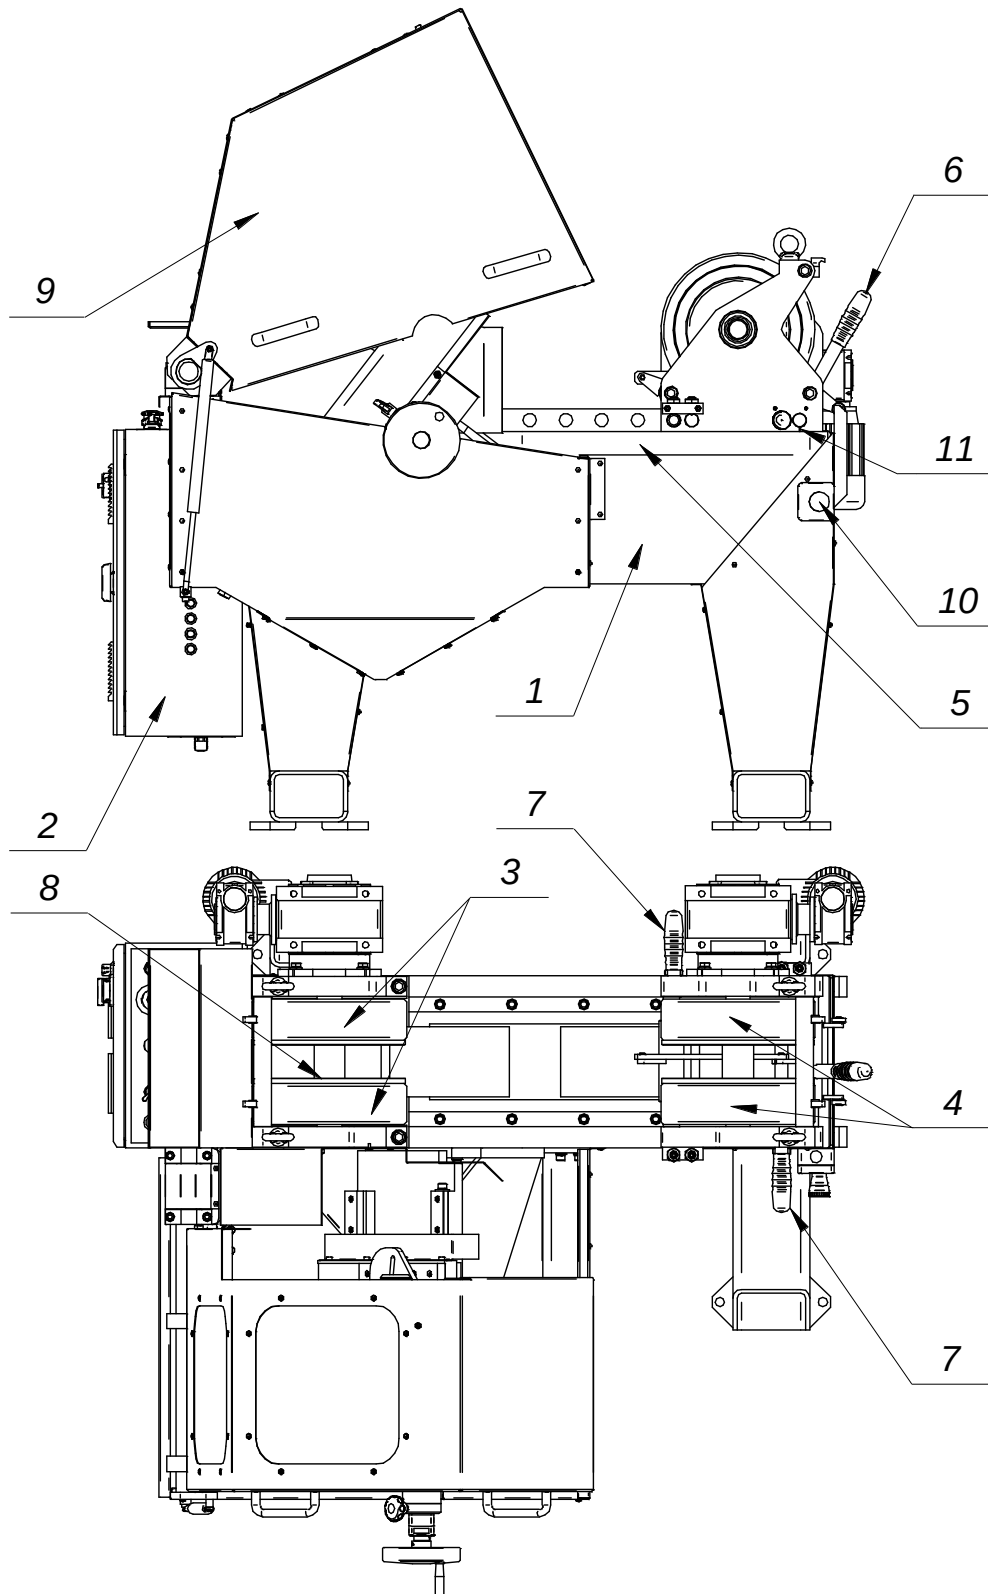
Active support design: 1 – body, 2 – control cabinet, 3 – fixed driving roller, 4 – movable driving roller, 5 – scale, 6 – rollers travel lever, 7 – movable roller pivot, 8 – chain guide, 9 – milling unit cover, 10 – emergency button, 11 – line indicating pipe position
